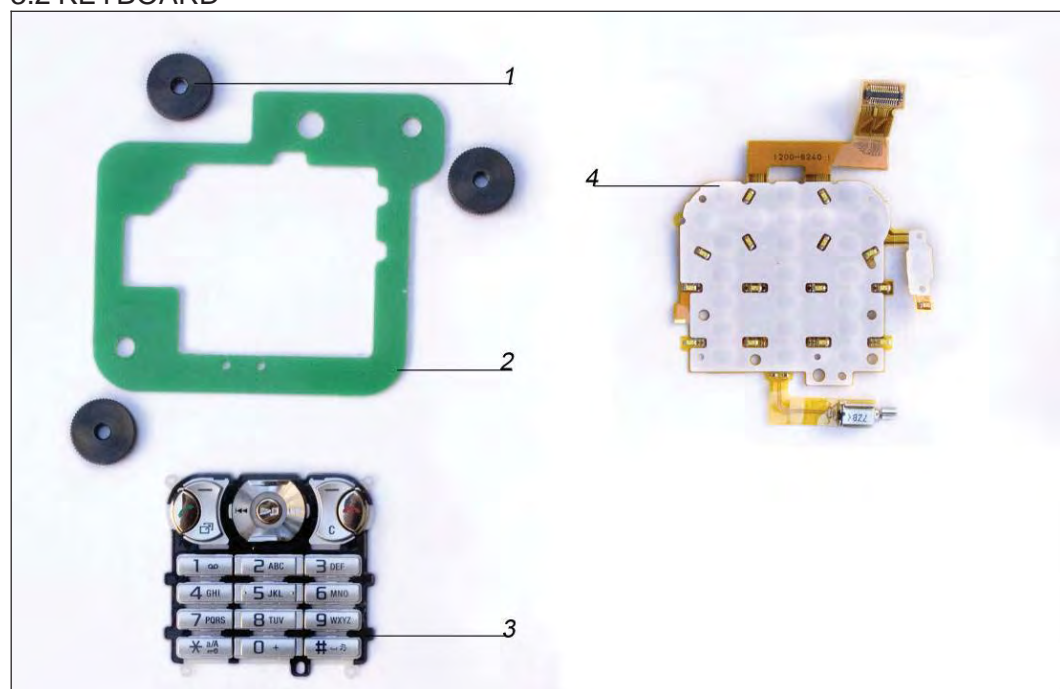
The components used when mounting the key board is: 1) three flat nuts 2) keyboard clamping frame, 3) keyboard main 4) keyboard flex module.
